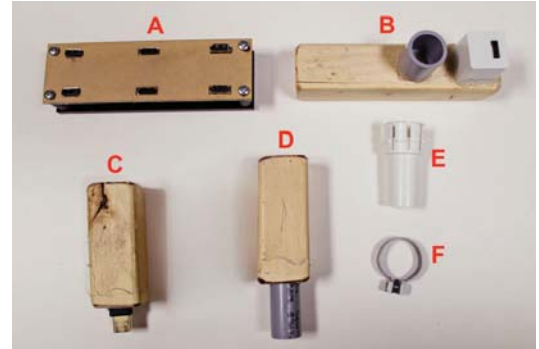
Workpieces used for the assembly experiments: USB female insertion rig (A), USB and Pipe female insertion rig (B), USB male peg (C), pipe (D), housing shaft (E) and retainer ring (F).
